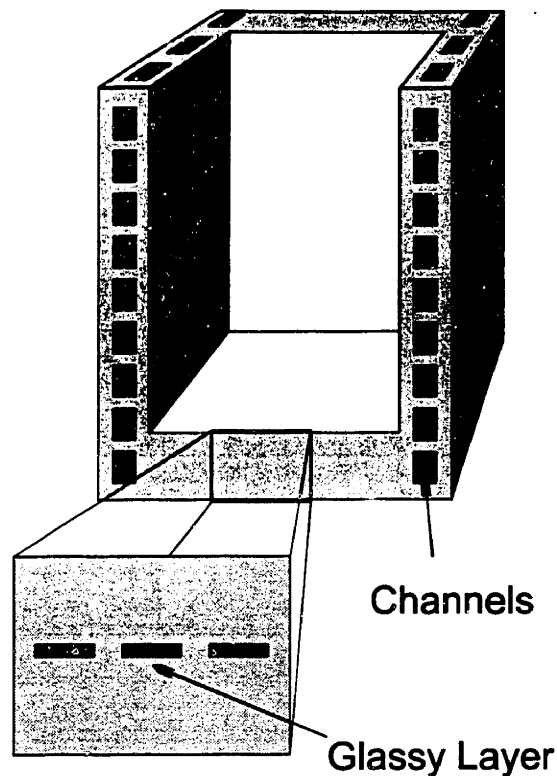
Schematic of a 3D-printed slip casting mold with channels and glassy layers to control the casting rate.
